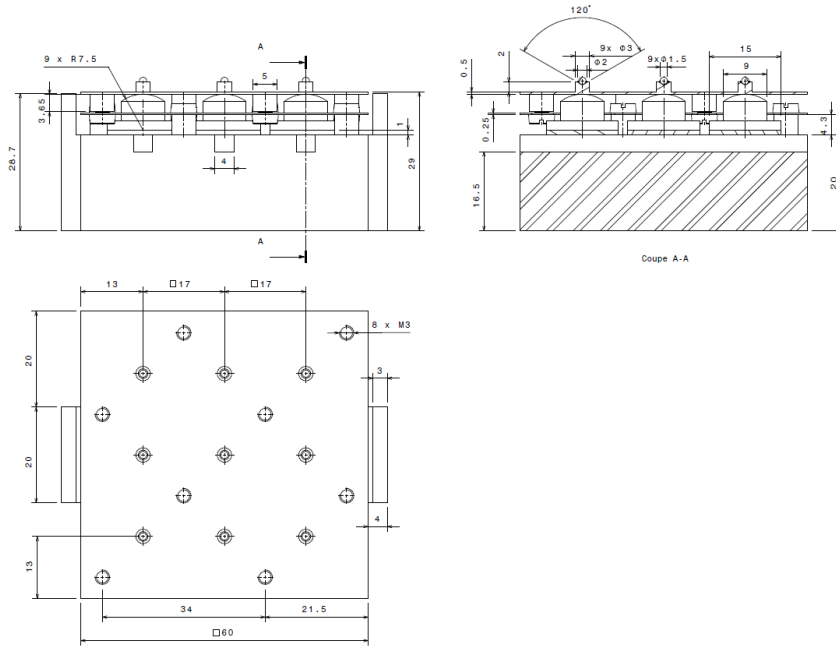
Final design and dimensions of the slider (using the general tolerances ISO 2768mK).
